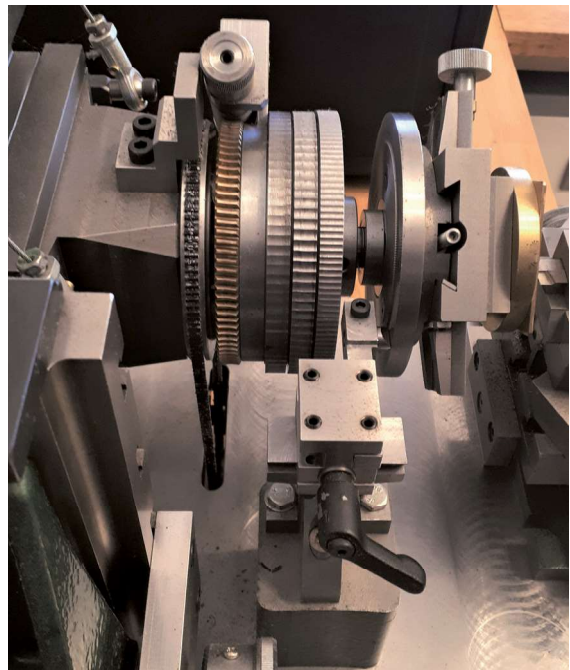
Set-up for Pump Action mode with touch piece engaged in face rose'
